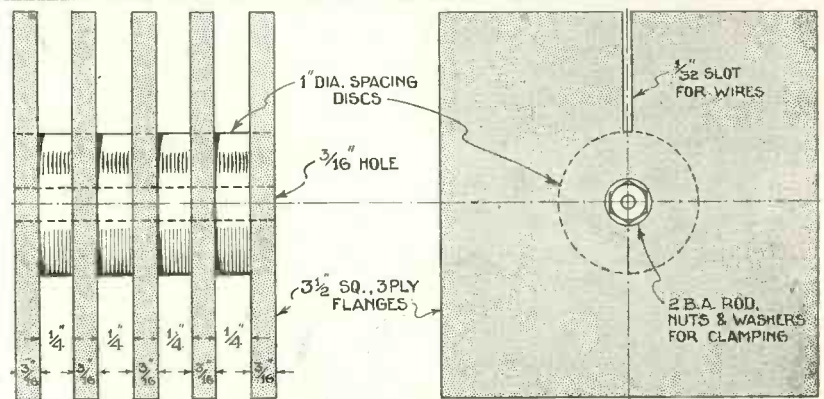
Coil for "whistle-killer." The flanges are of ordinary three-ply and the "cores" of broom-handle or ebonite rod. Remember the saw-cuts in the flanges to let wire through from one section to the next. Assemble on a length of 2 B.A. screwed rod, and wind 550 turns of No. 30 gauge d.s.c. in each slot
